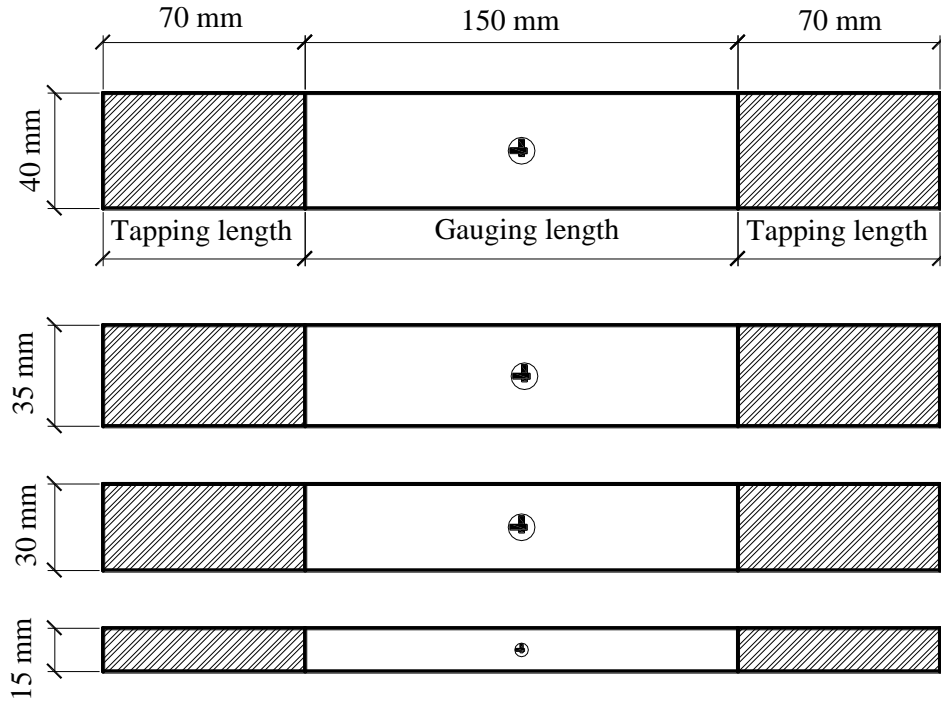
Dimension of longitudinal coupons and tabbing lengths
